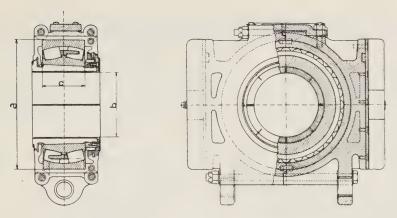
S. K. F. inside type single bearing with double row of rollers forming a spherical bearing held on the journal by a split coned sleeve.
